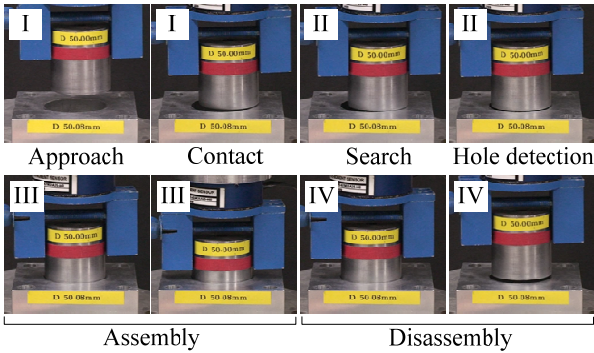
Sequence of robotic assembly (peg-in-hole)
